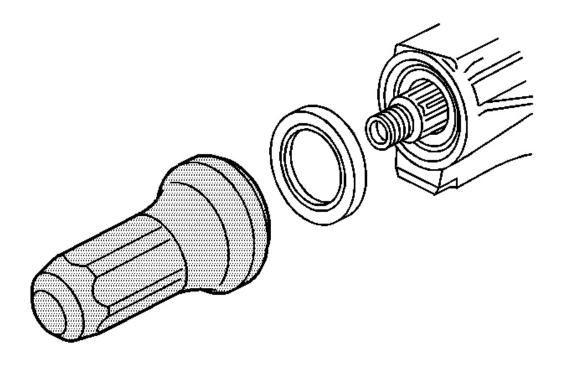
View Of Pinion Gear Oil Seal & Installation Tool Courtesy of GENERAL MOTORS CORP.
